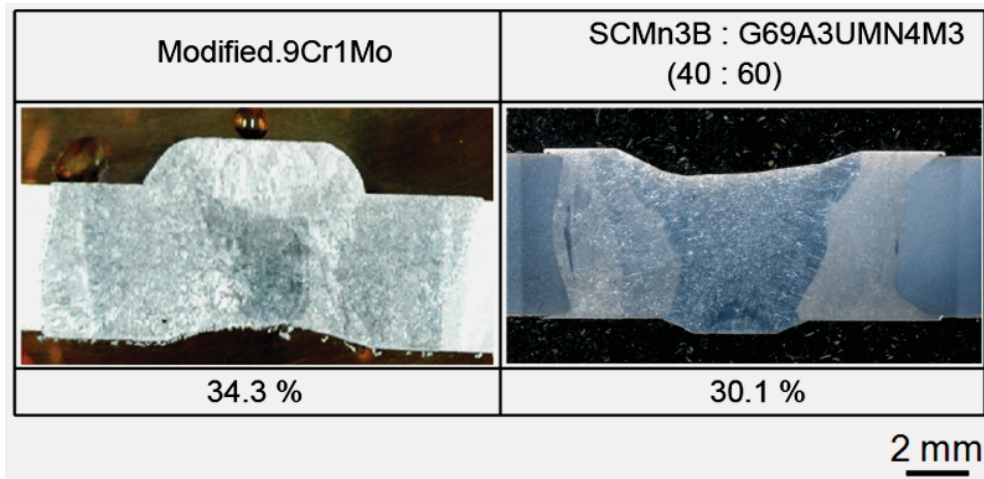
Typical dilution ratio and cross sectional welds after butt welding.
